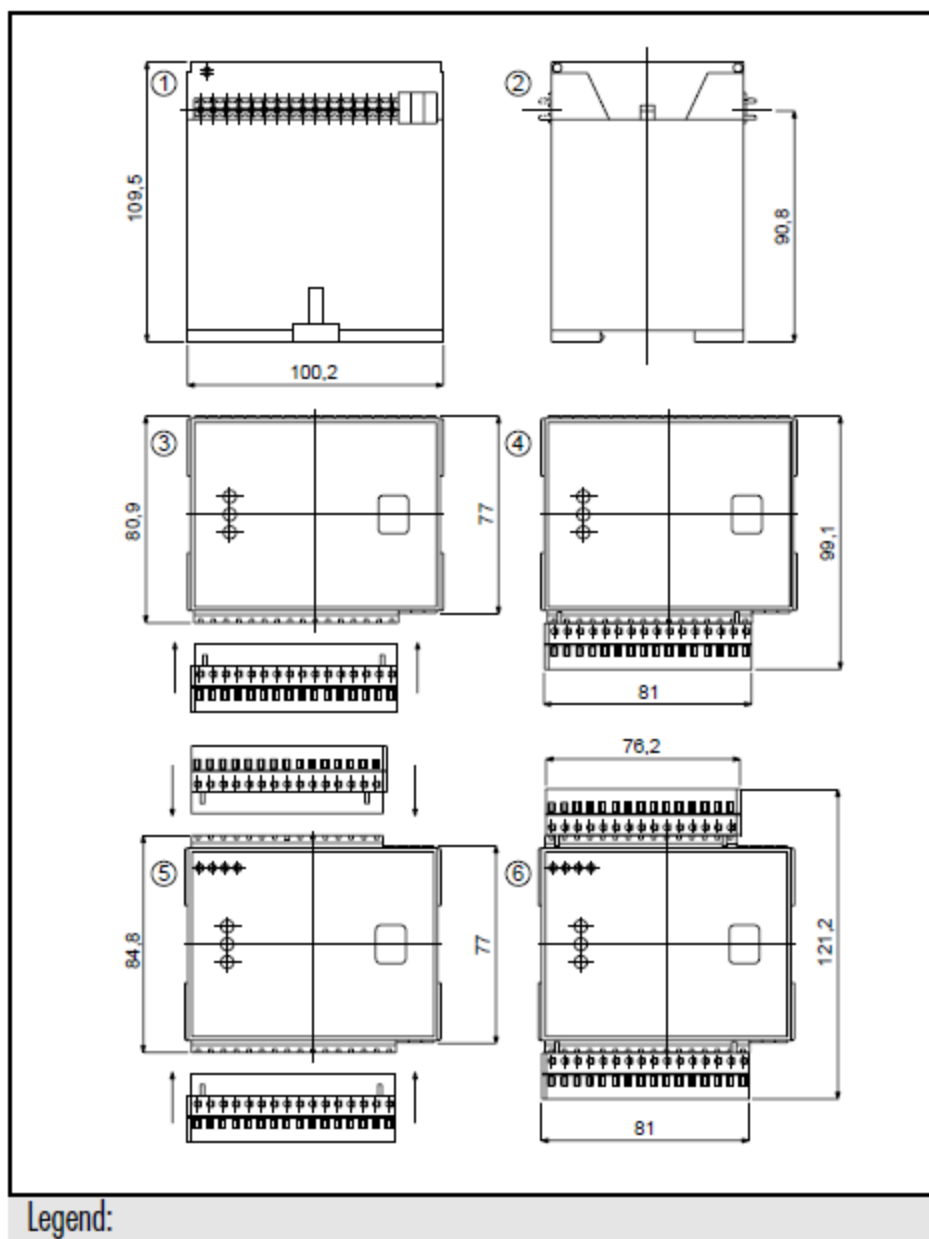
Main dimensions of SBCRO3-Muting control unit housing with connectors
